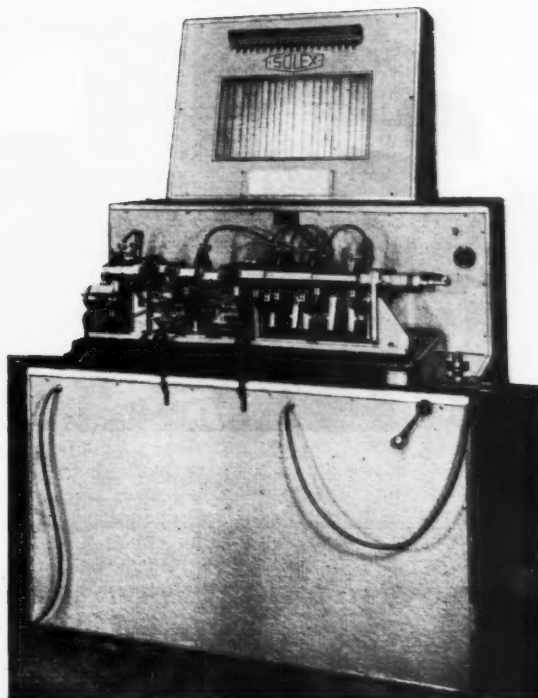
Line inspection—a further development of crankshaft gauging. The component is located in vees by means of pneumatically operated roller clamps, and air cylinder equipment is applied for pressure on datum faces.
